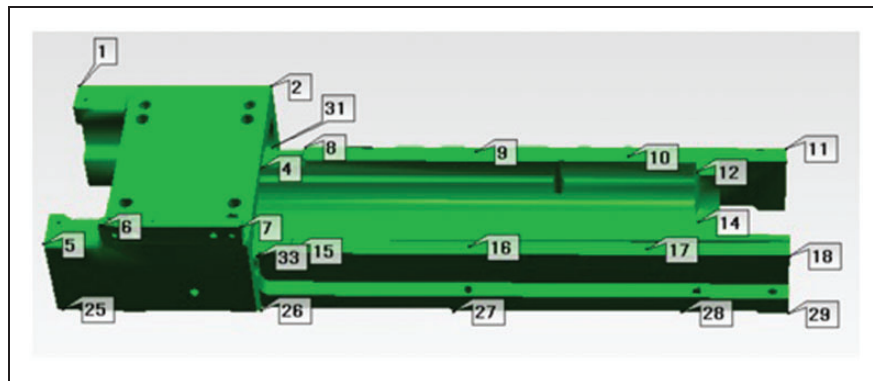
Geometric model of the cast iron lathe bed with measurement locations.
